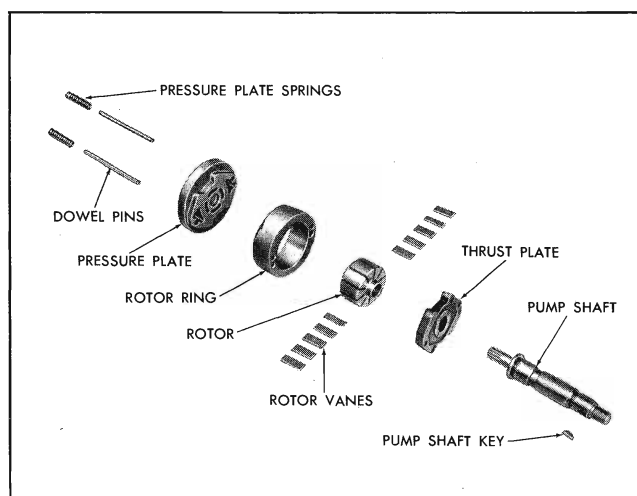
A-50 Shaft and Rotary Group—Exploded View
